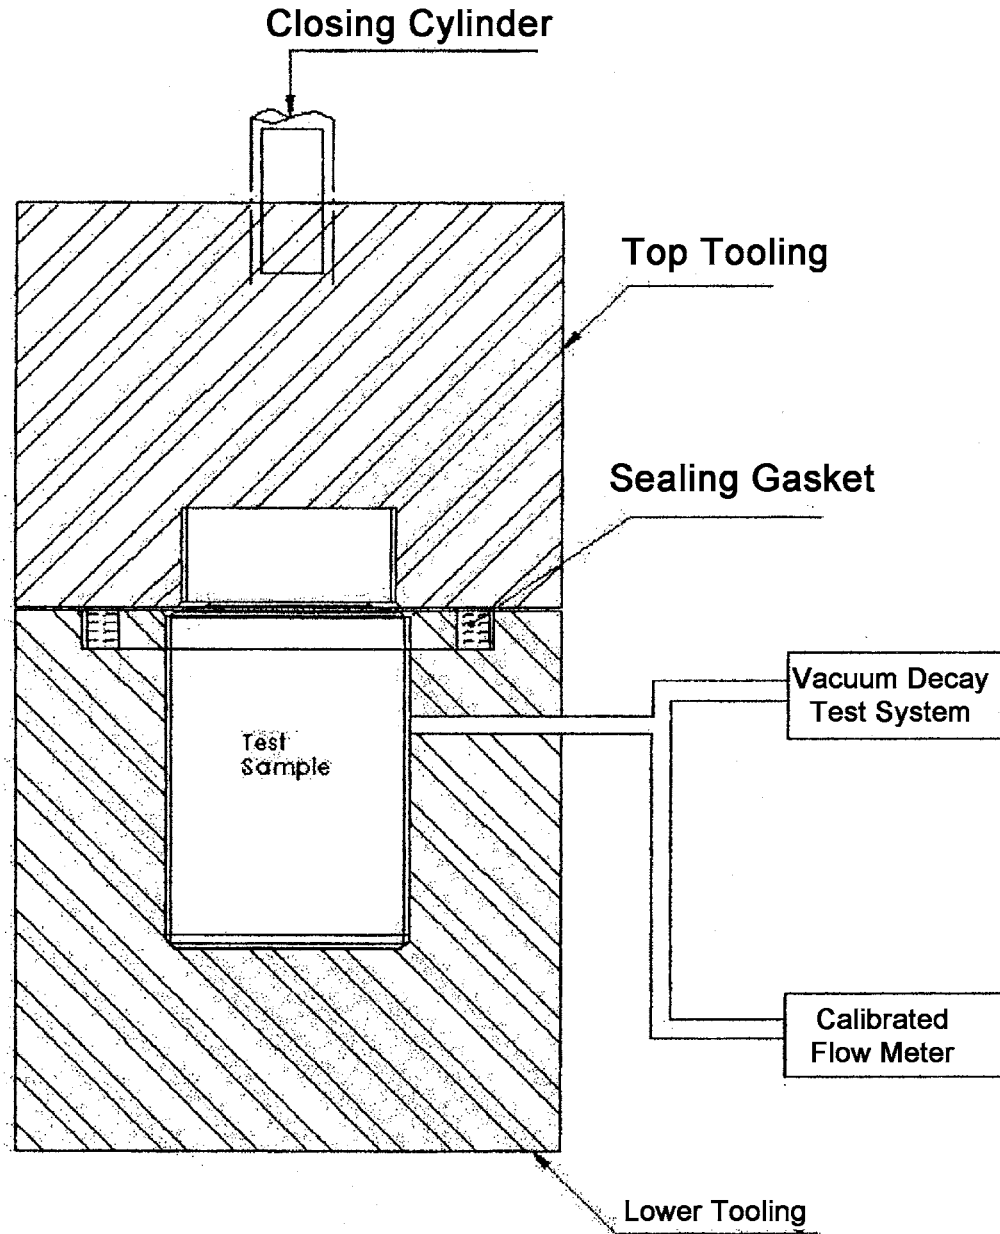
Schematic of Fixture and Rigid, Nonporous Test Package
